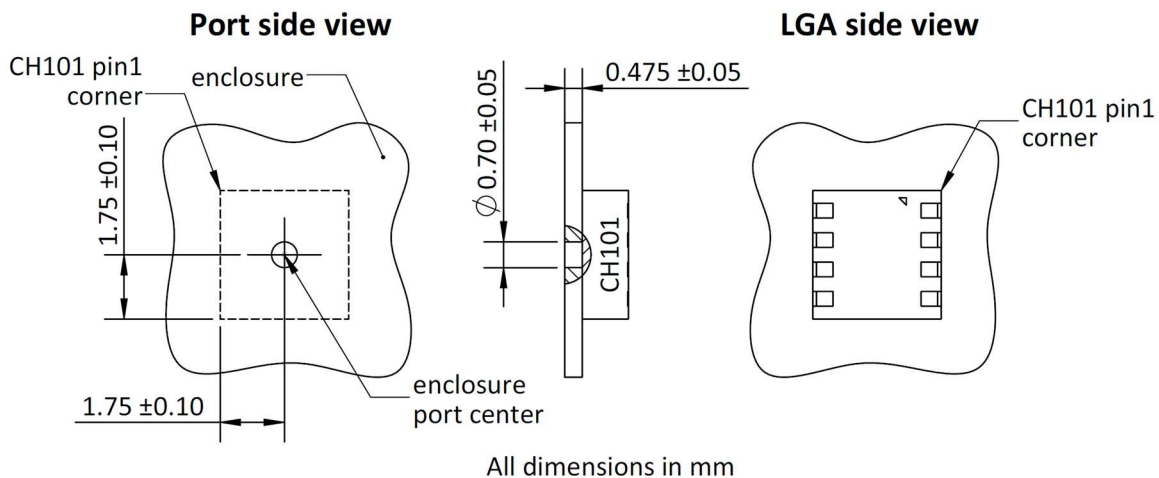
Schematic view of the required dimensions and tolerances of enclosure port and its location relative to the reference corner of device
